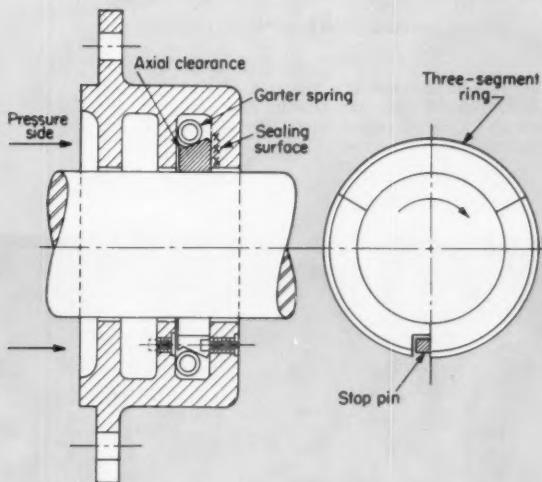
Butt joints are cut on radial lines in this segmented-ring seal. Leakage between the ring and the shaft is held to a low value by a minimum-clearance fit. Average cold clearance for a 2-in. diam shaft, assuming 600-F shaft working temperature, is 0.006 in.
